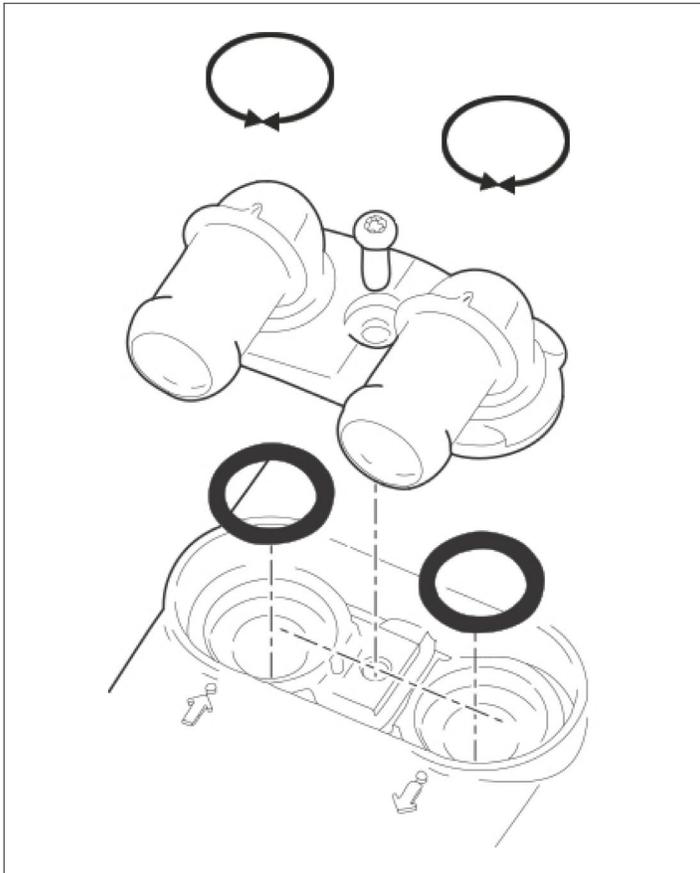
Coolant Connections at Heater (90° shown, straight similar)
